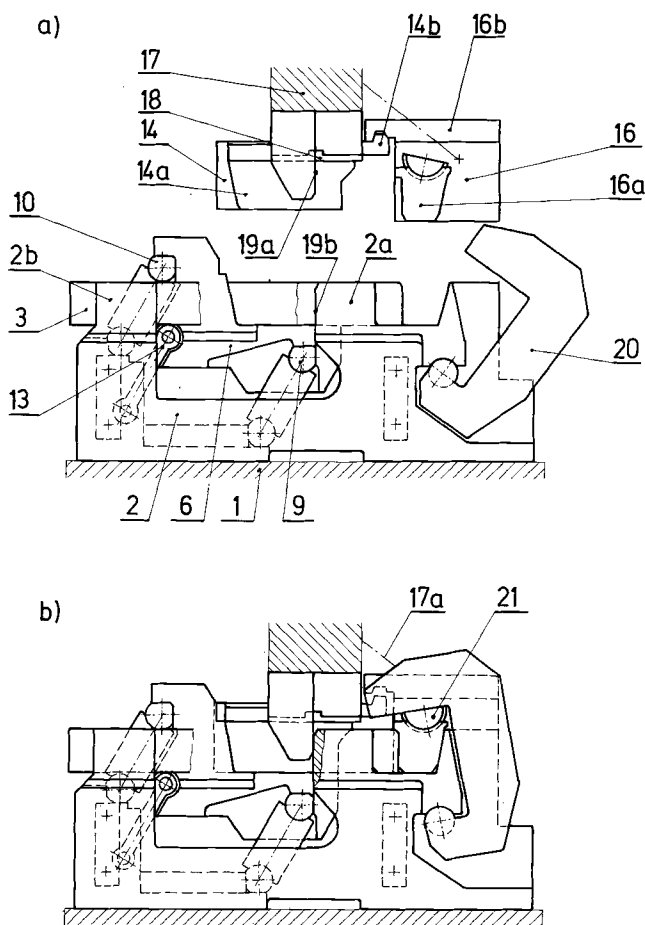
View of the forging device: (a) When crosshead of the press is in top position; (b) In open position when die inserts and the blank has come to contact.
